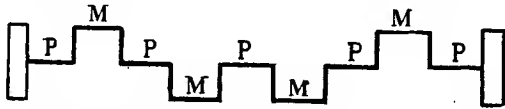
Arrangement of Four-Throw Crankshaft for Antoinette Eight-Cylinder Engine.
